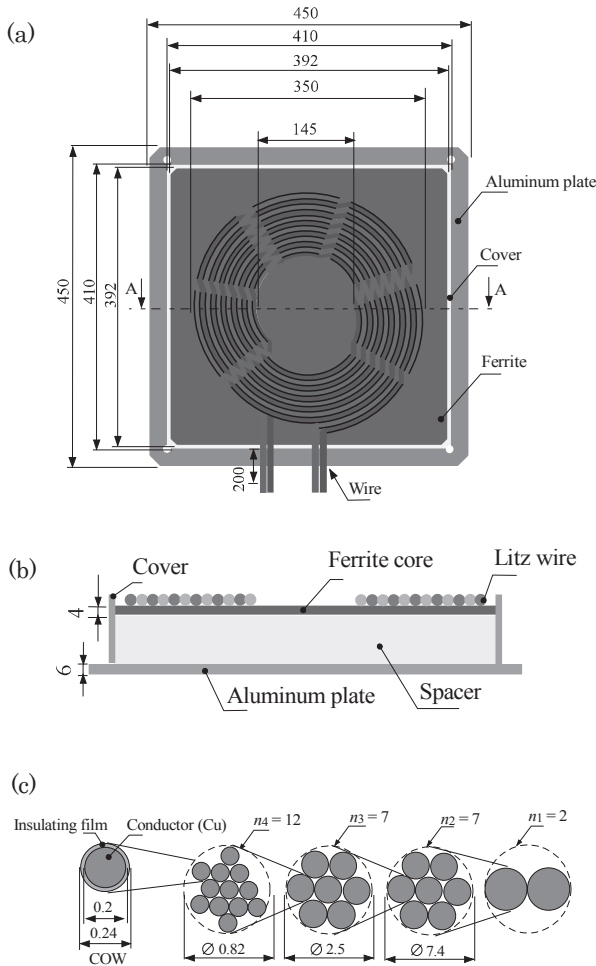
Structure of the litz copper wire (LCW) coil (unit: mm): (a) plane view and (b) sectional view. (c) Structure of the LCW.
